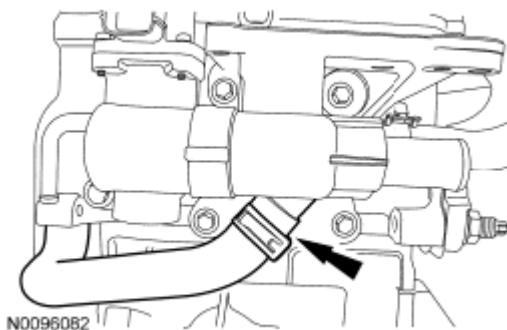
Locating Coolant Bypass Hose On Coolant Outlet
